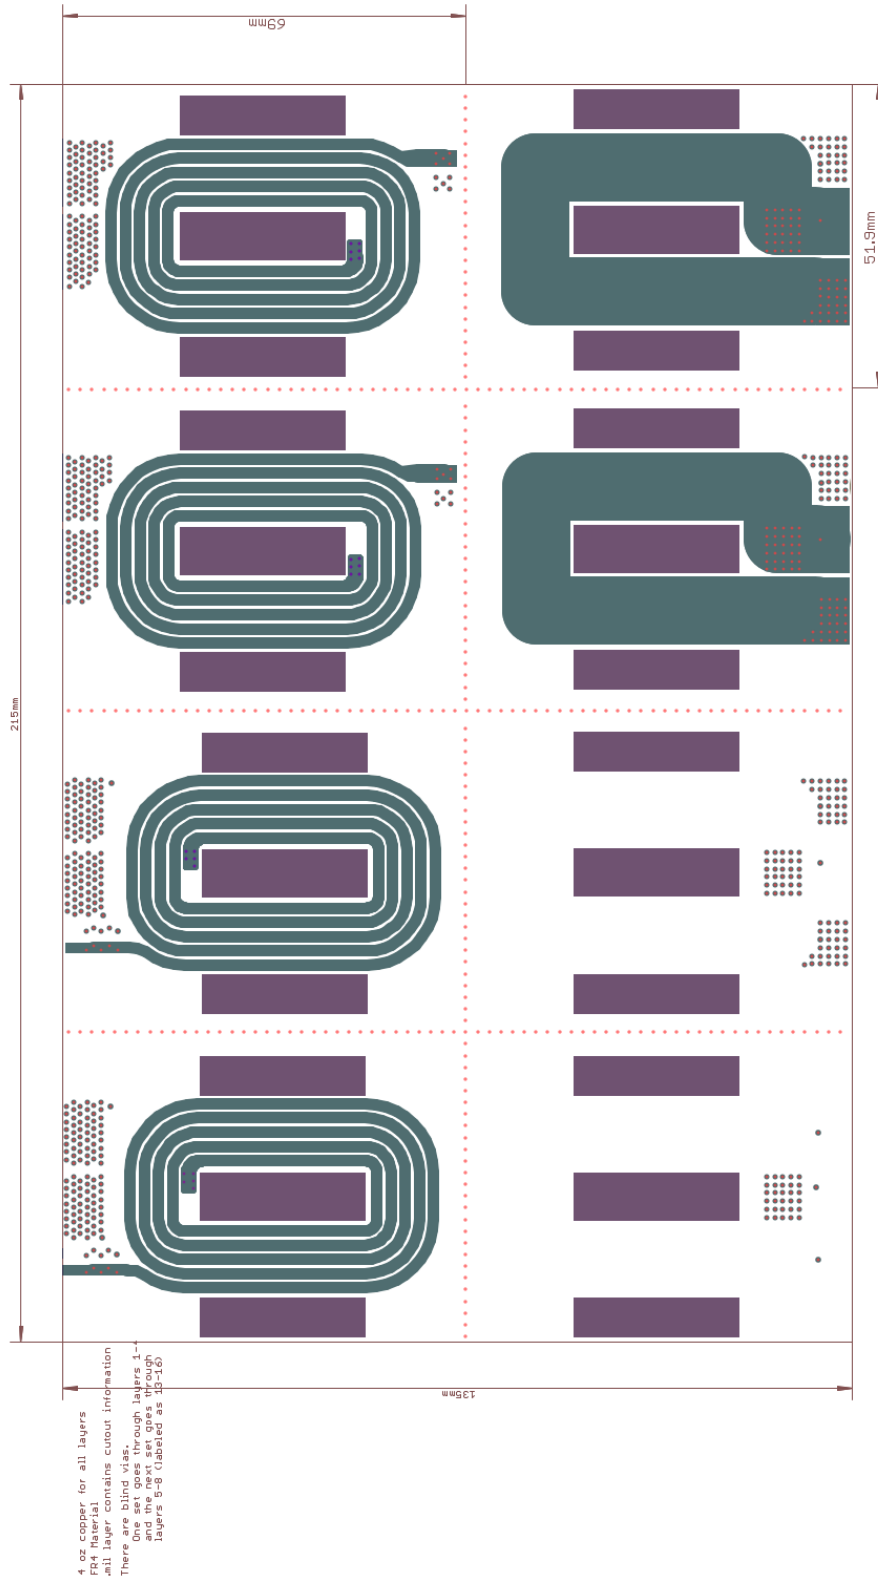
Layer 3 of the ICN transformer PCB winding (located in the top left) and other magnetic component variants. The purple rectangles indicate cutouts in the board.
